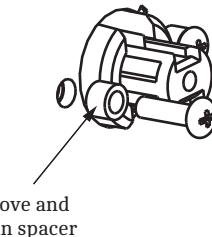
Remove Spacer and Reseat Screw to Disable Locking Mechanism
